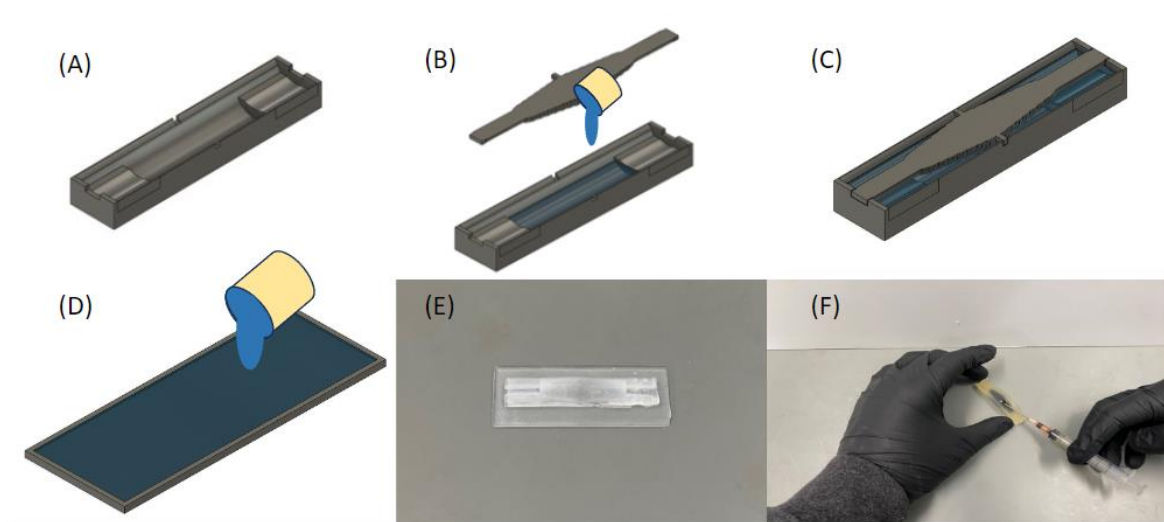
Here is the fabrication method for a singular side of the node. The mold of the top portion a). Silicone is poured into the mold then the insert to get the tab shape is placed b), c). The insulating tab is also made, it consists of a flat sheet of silicone d). The two molds are removed and fused together using silicone e). Once cured the ferrofluid is added f).
